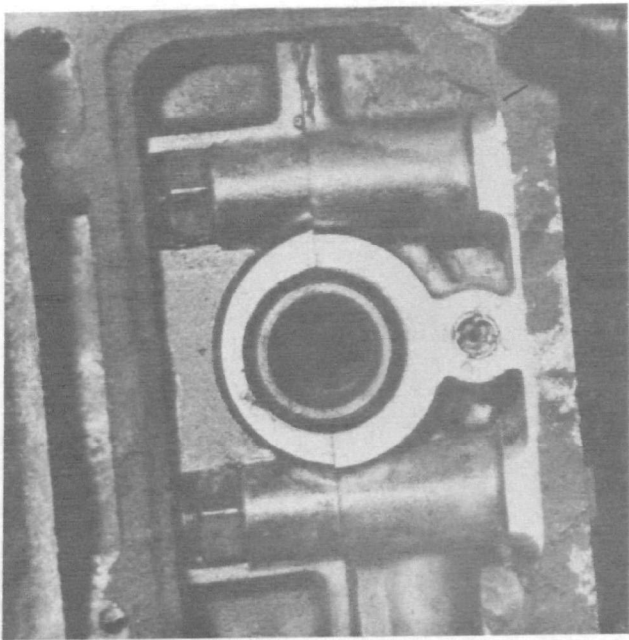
Bottom surface of power-head, engine 29, showing crankshaft and check valve
